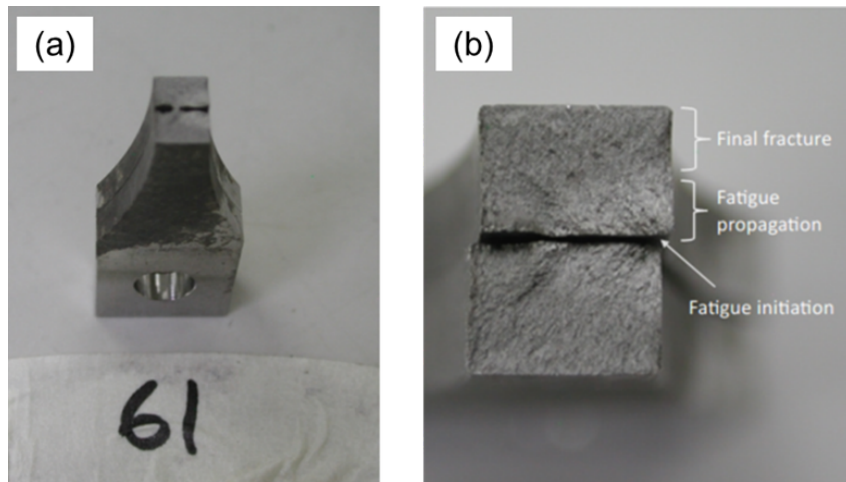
Picture of (a) fractured AM.LSP specimen and (b) closeup photograph of fractured surface
